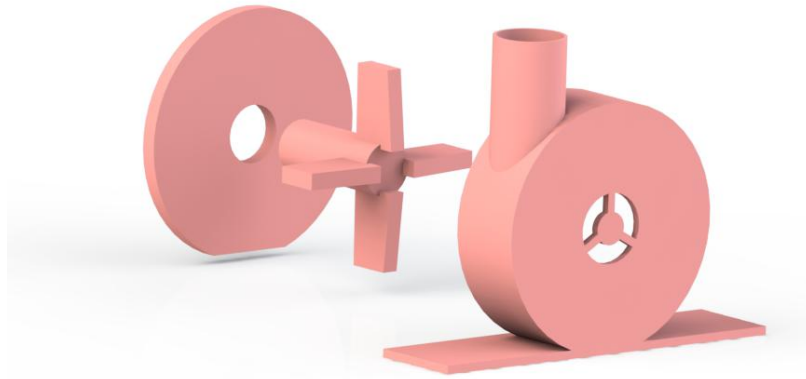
Exploded view of the pump. The three components include the main housing, the impeller, and the housing cover.
